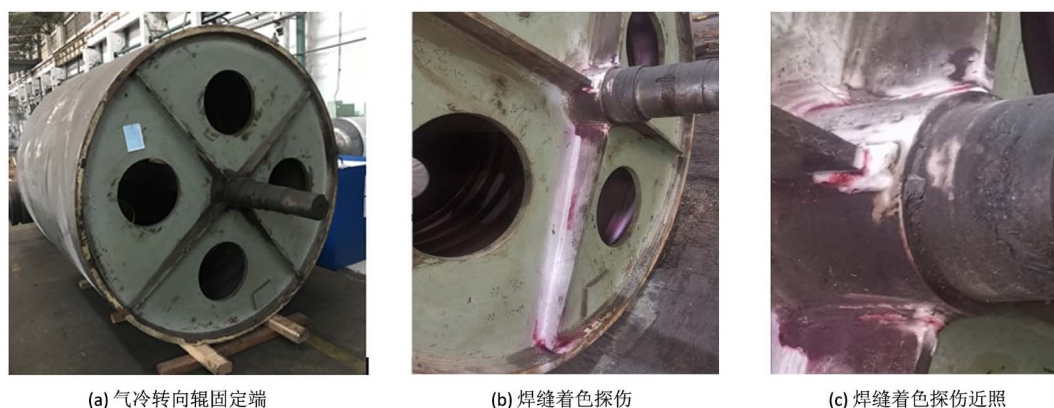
Arc welding connection and weld dye detection of fixed end of steering roll
